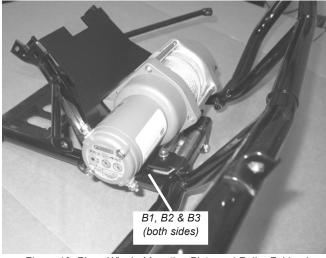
Place Winch, Mounting Plate and Roller Fairlead
